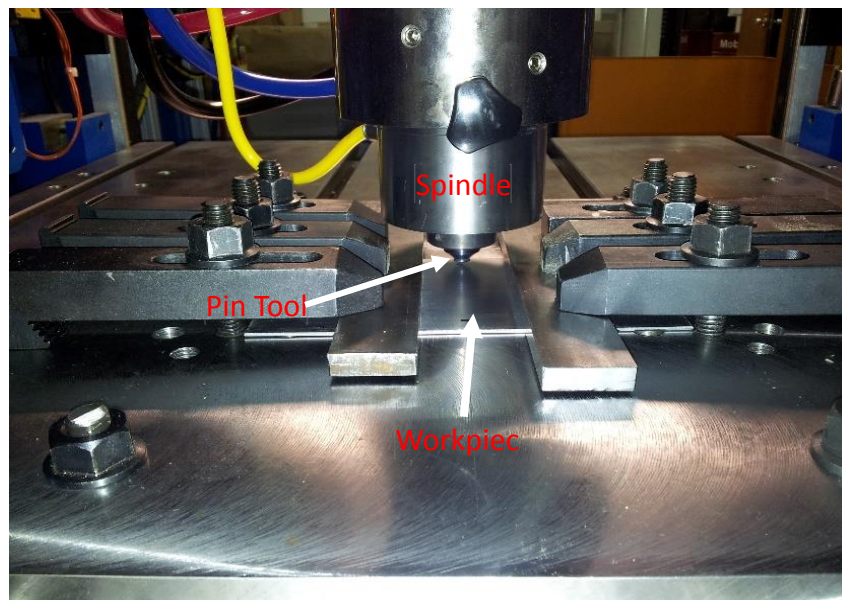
Friction Stir Welding setup for developing beads on steel plate.
